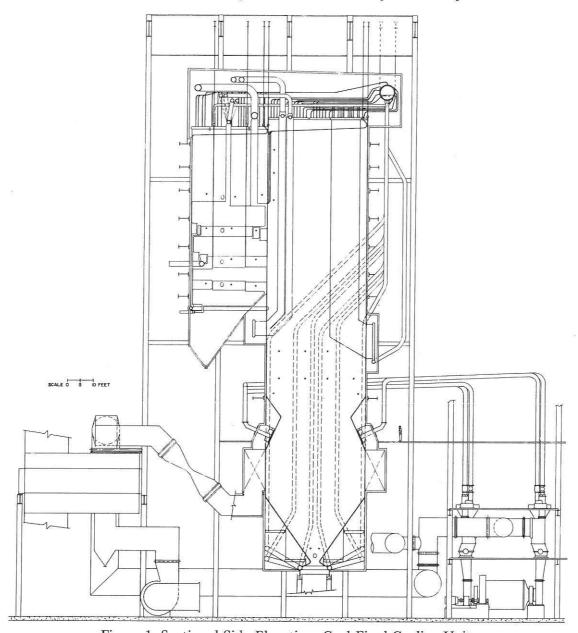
Sectional Side Elevation, Coal Fired Cycling Unit
